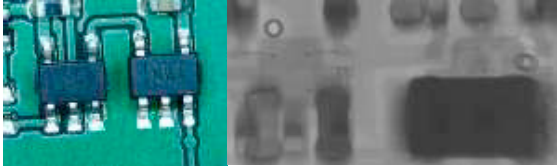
(a) Visual inspection of parts W11 & W12; (b) x-ray inspection of W11 & W12, showing differences in internal wiring
